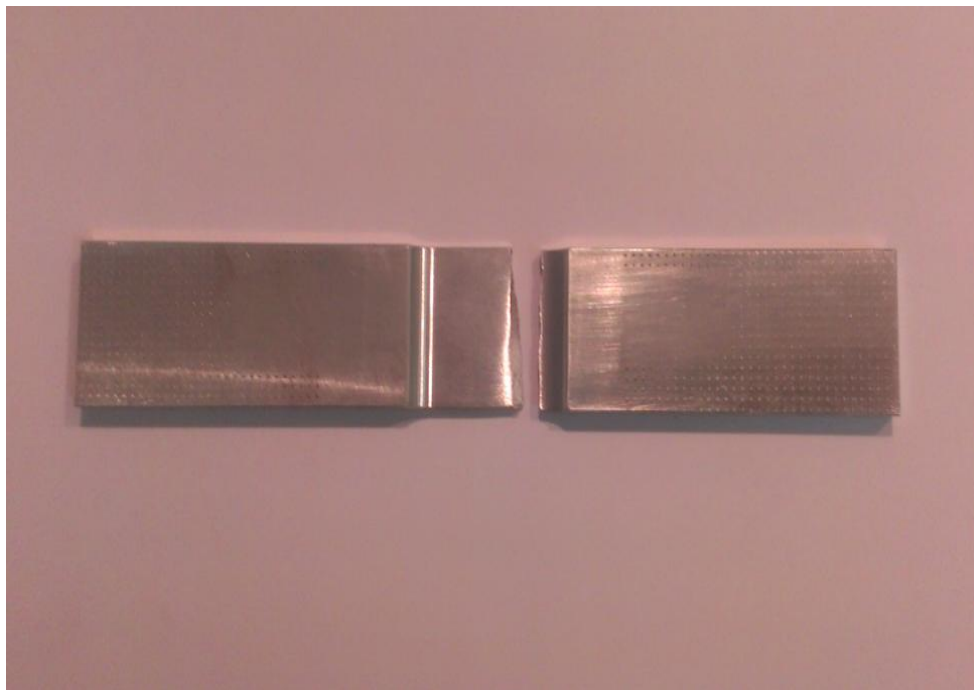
Open Hole in Radius Test Specimen -1 Post-Test Picture
